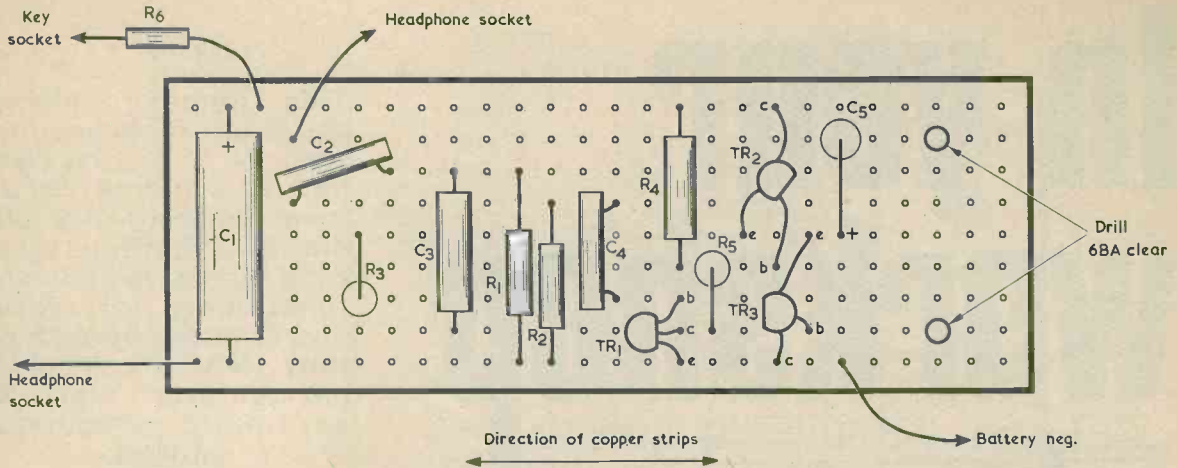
The Veroboard layout. C6 is not mounted on the board but is wired across the headphone socket
